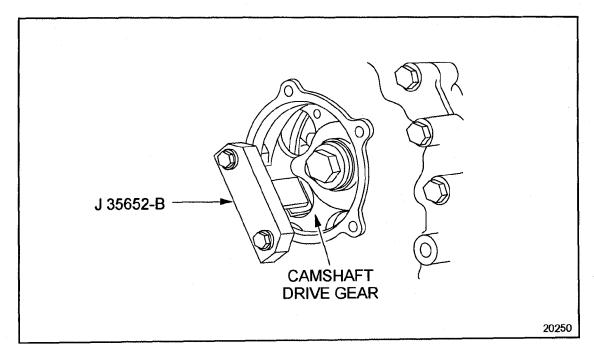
Camshaft Drive Gear Torque Holding Tool Installation
